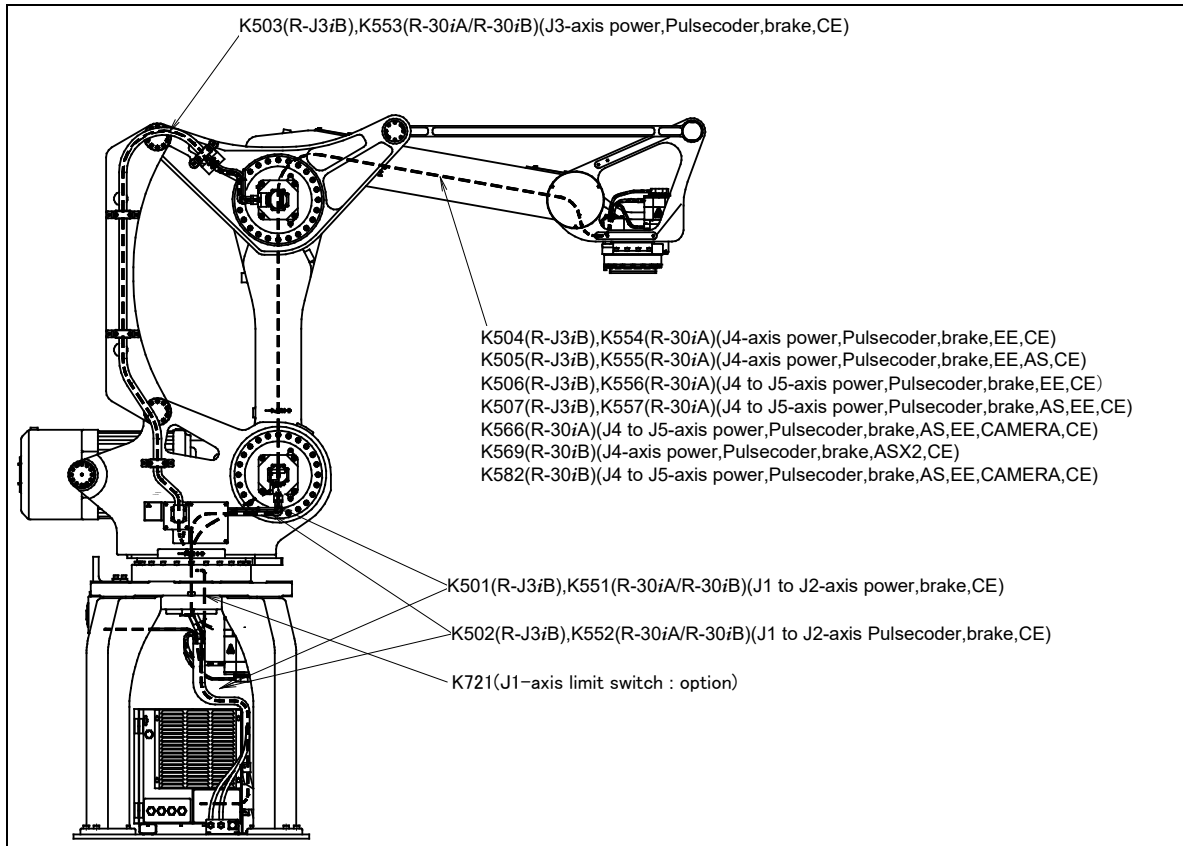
(a) Wiring diagram in the mechanical unit (Integrated type controller)
